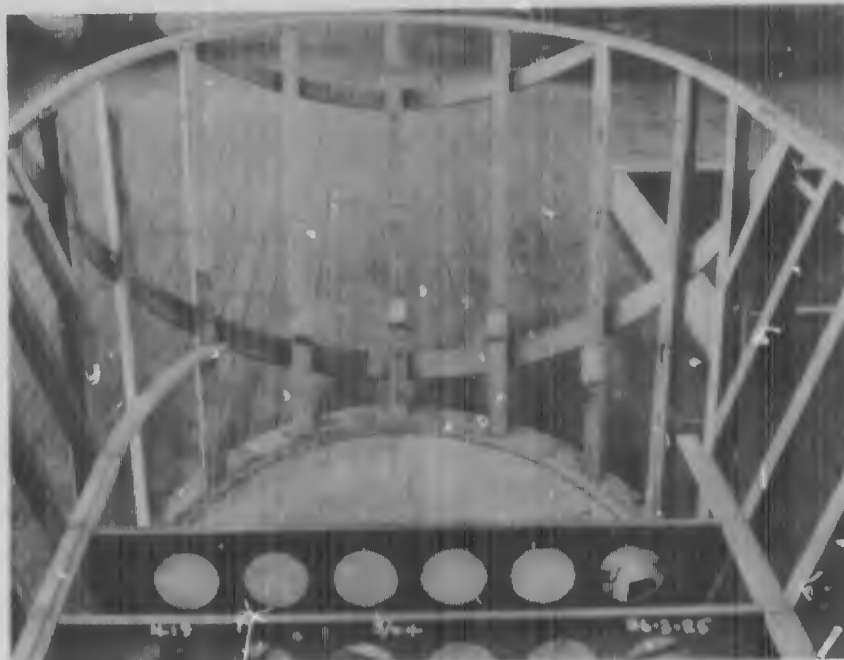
LOCATION OF BUTT STRAPS. Fan type framing in the bow with butt straps in place for attachment of plywood skin.
